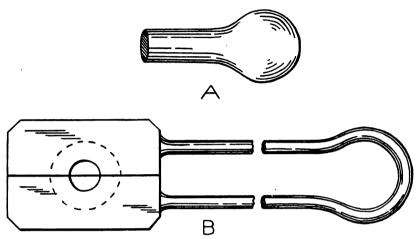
ASH PAN SHAKER FORGING. TOOL FOR FORMING BALL.
